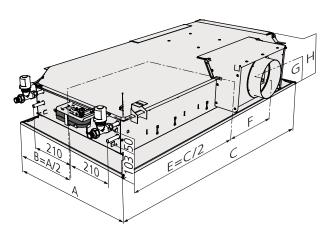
Dimensional drawing - long side connection (the length 1200 with air connection on side 2 is shown in the example).
